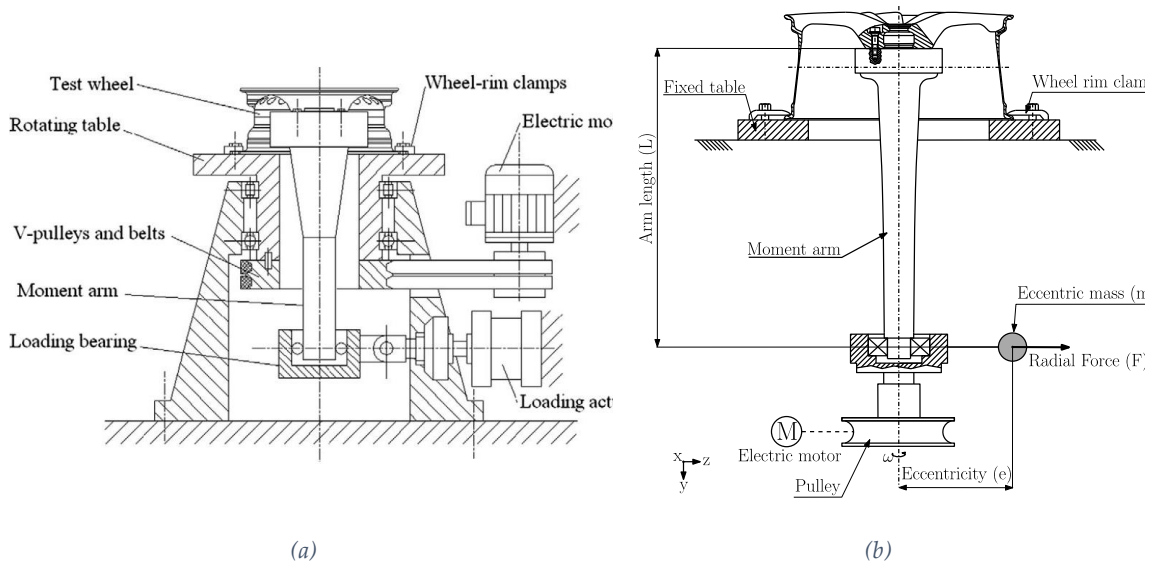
cornering fatigue test rig layouts: a) with rotating table [15,19,47] and b) with an eccentric mass [13,18,23]. From [60]
